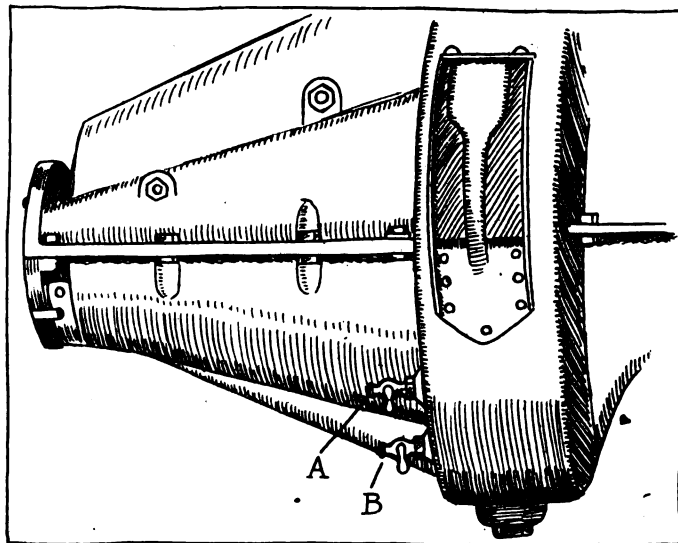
Trycocks for oil level on the Ford flywheel housing
